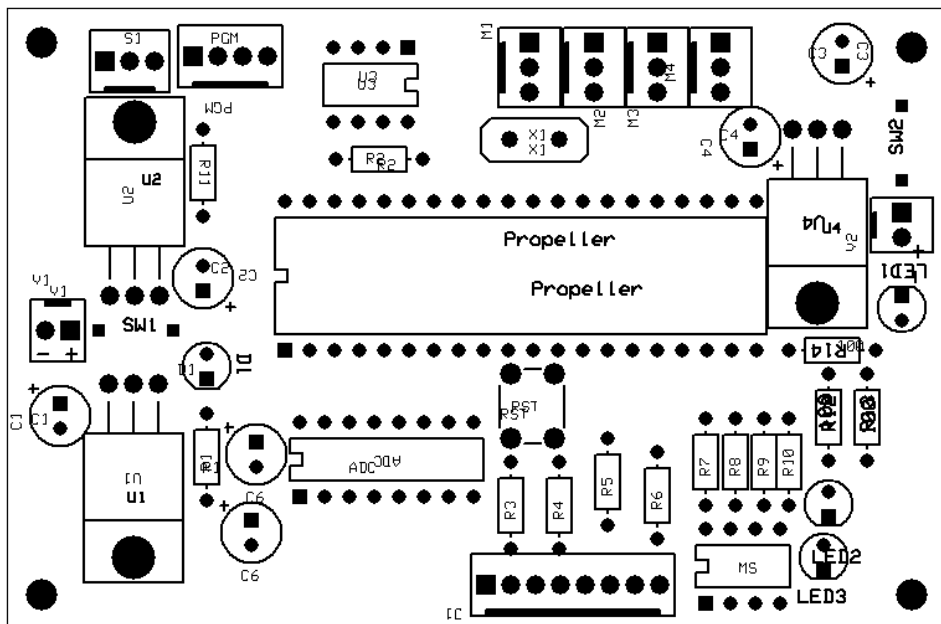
Luke's Hand PCB Mechanical Drawing
